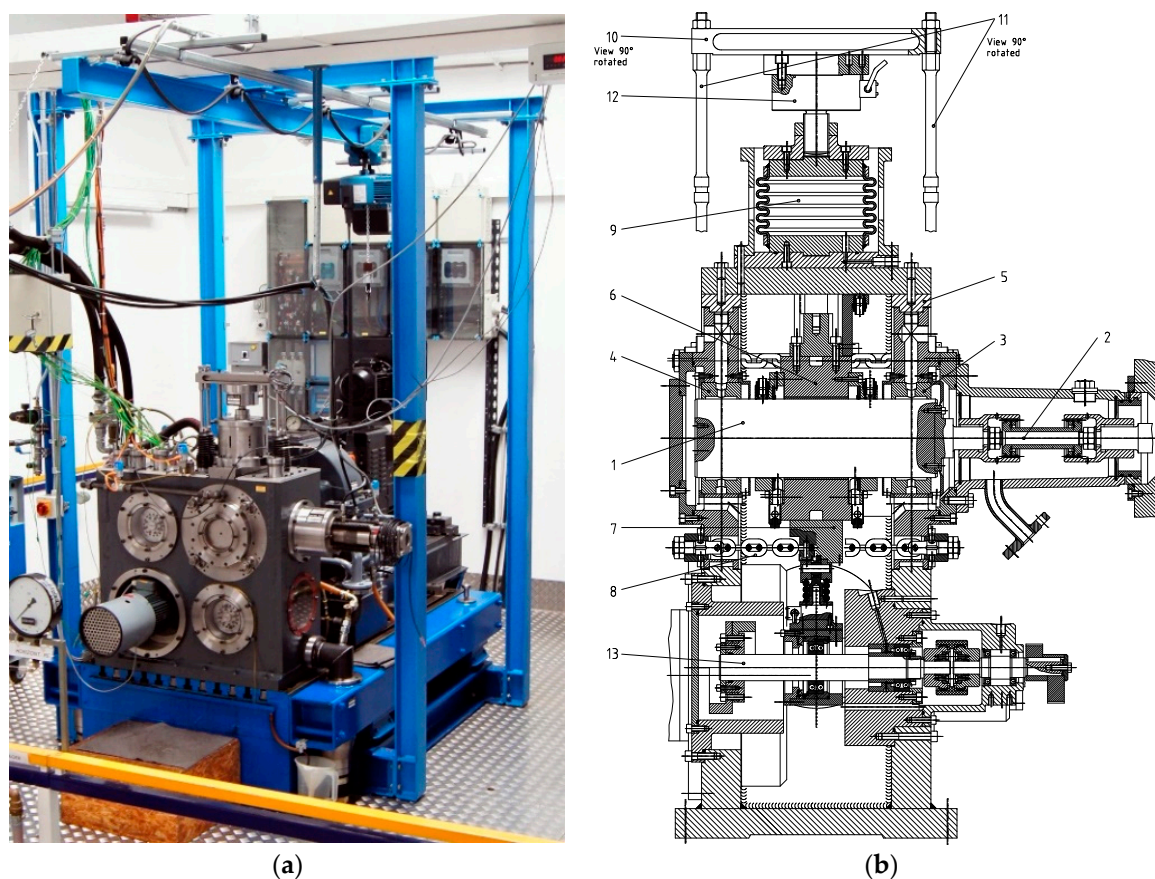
(a) Journal bearing test rig front view photo; (b) test rig core sectional drawing.
